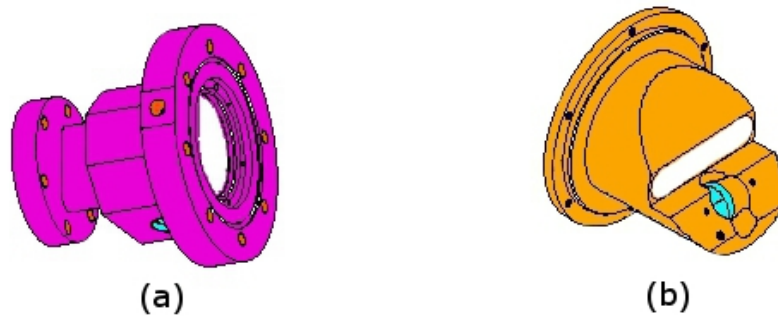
(color) (a) Technical drawing of the stainless steel flange with the vacuum window is welded to it. (b) Technical drawing of the aluminum mount that holds a 0.5 inch turning mirror oriented at 45° with respect to the incident laser beam.
